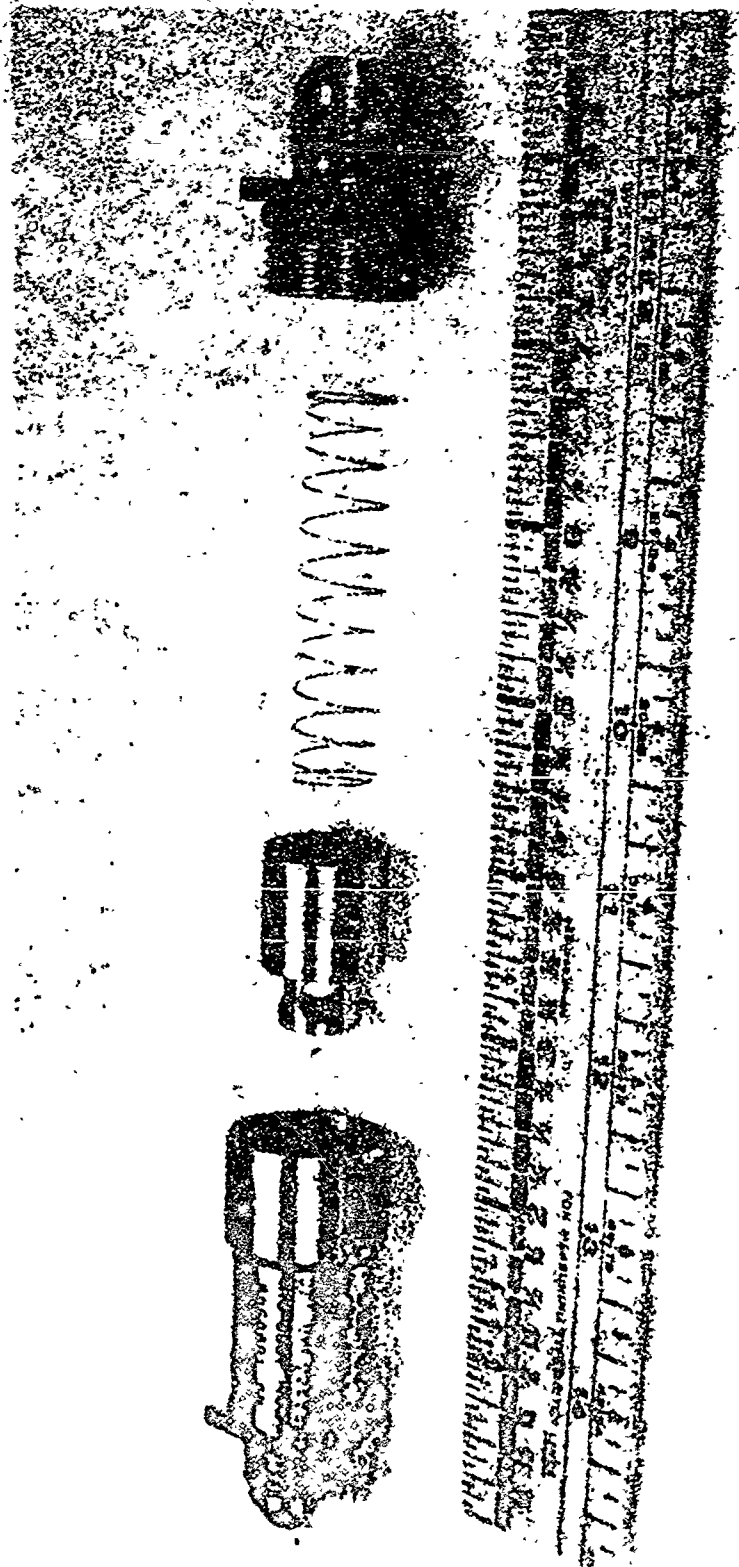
CHECK VALVE EXPLODED VIEW, DARCO 1/2 INCH DIA.
